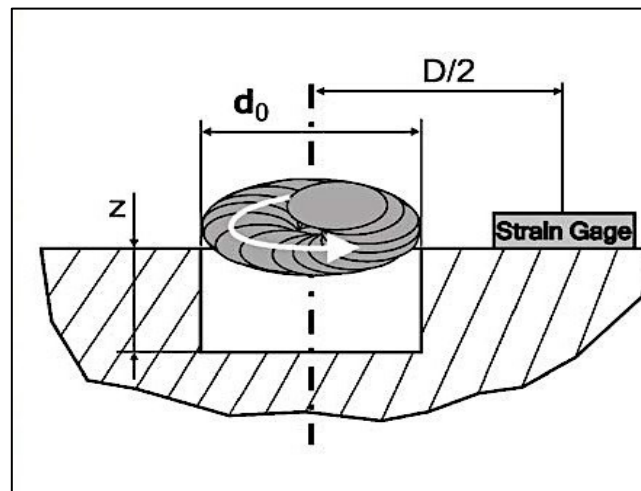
A flat-bottom hole was drilled after each increment of IHD measurement [78].
